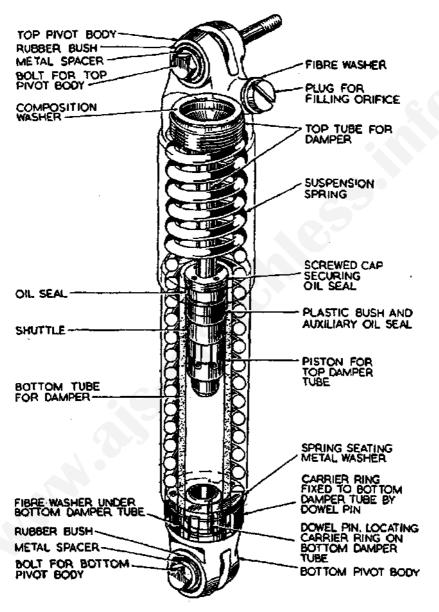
VIEW OF " TELEDRAULIC " LEG.
